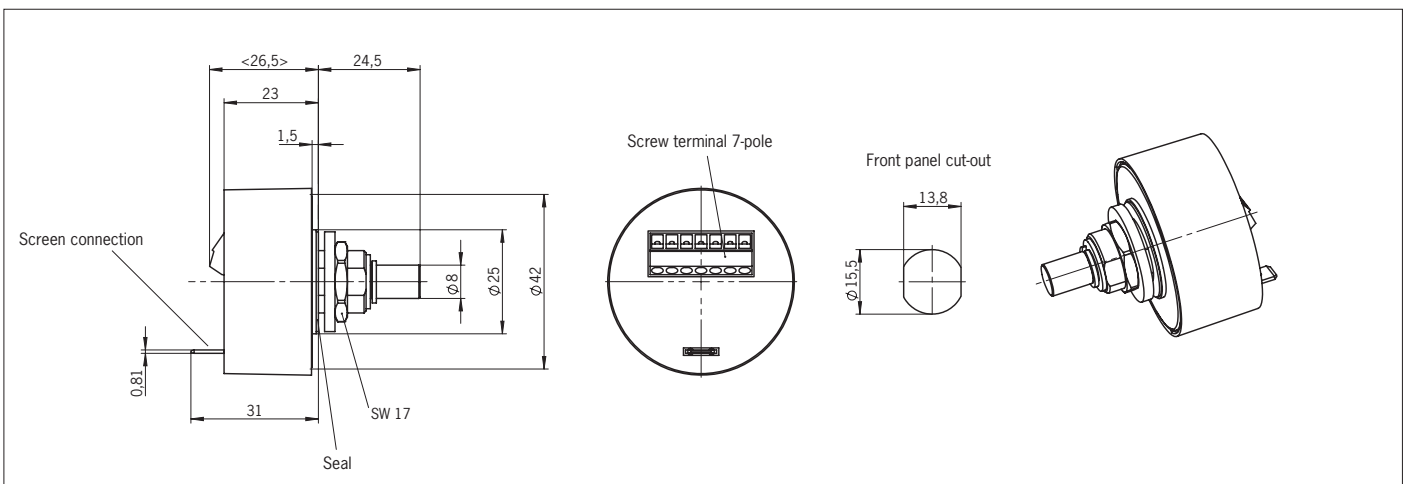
Dimension drawing of handwheel HKB with pushbutton function
